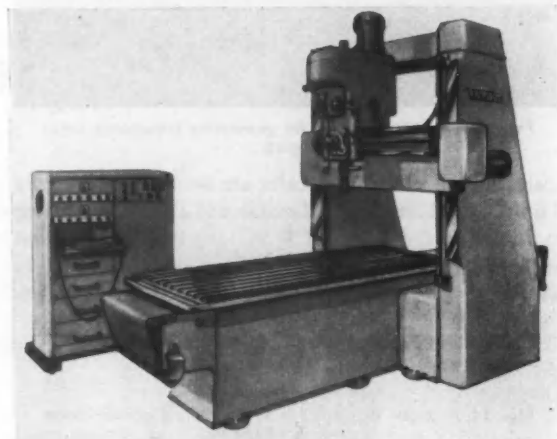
The Wadkin co-ordinate drilling machine also uses discontinuous position control
